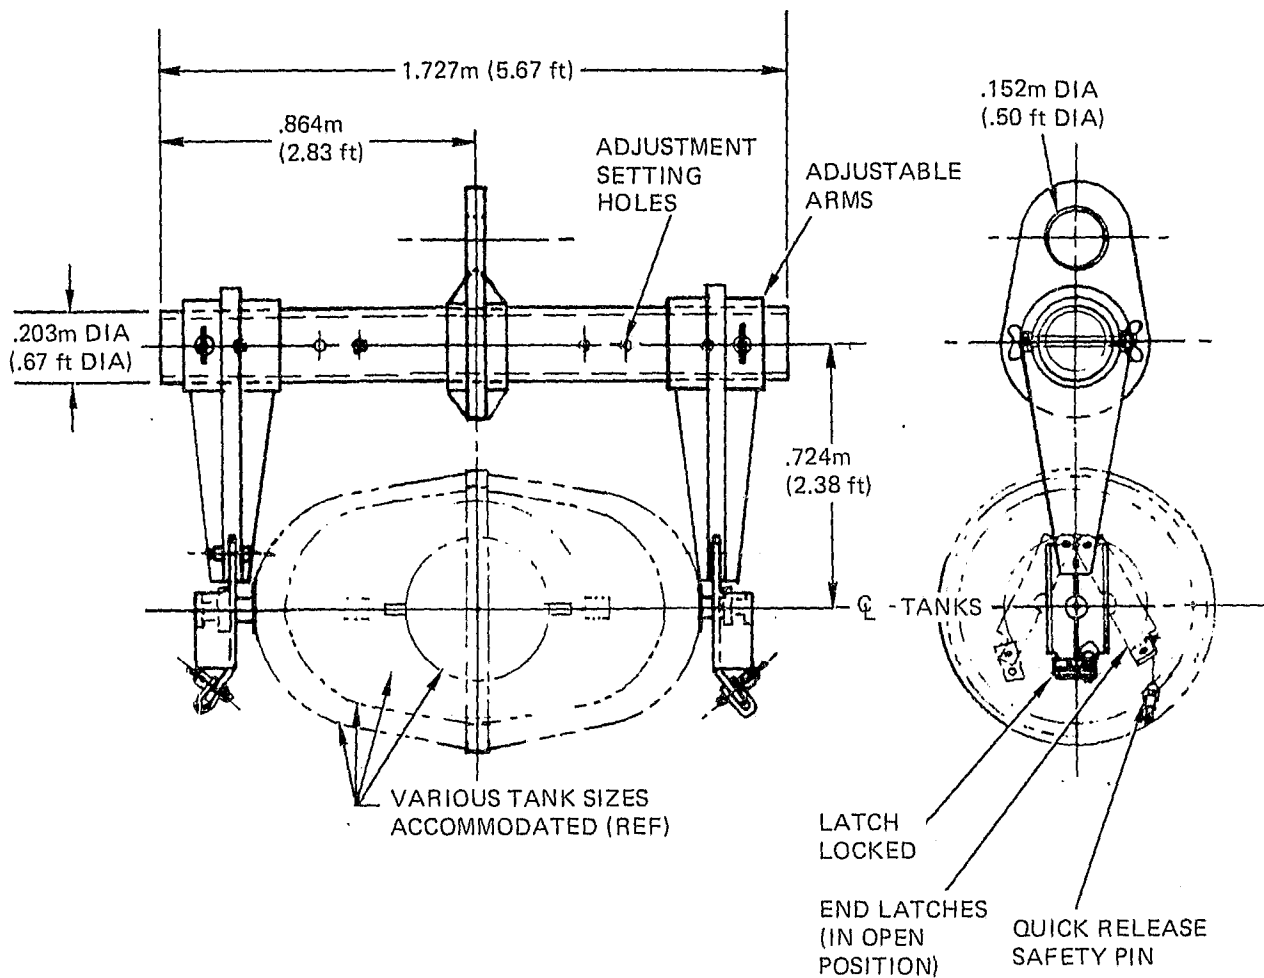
HOIST SLING FOR PREPACKAGED PROPELLANT TANKS
